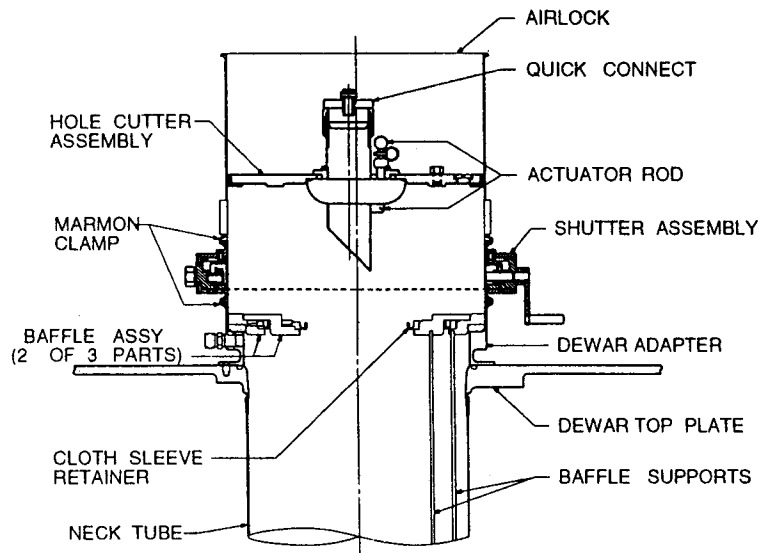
Lead shield hole cutter assembly in process of being installed through airlock and shutter into the dewar adapter. Dashed line represents the plane of the Mylar shutter film.
